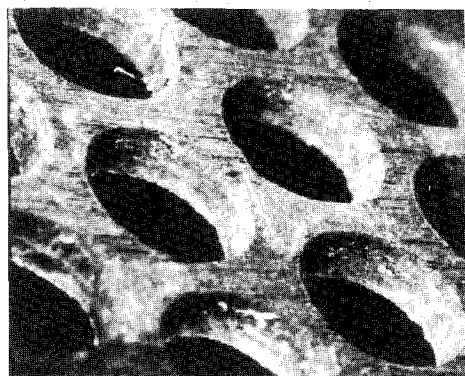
Laser-machined holes in a carbon-carbon test coupon.
